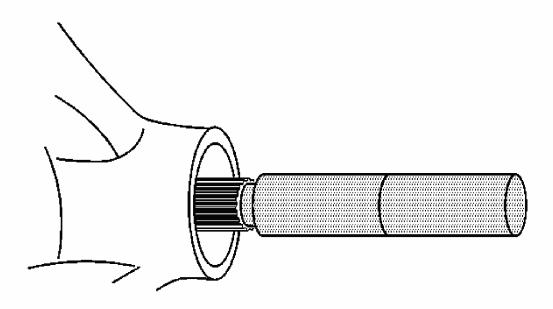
Installing J 22536 Or J 44421 On Pinion Courtesy of GENERAL MOTORS CORP.
